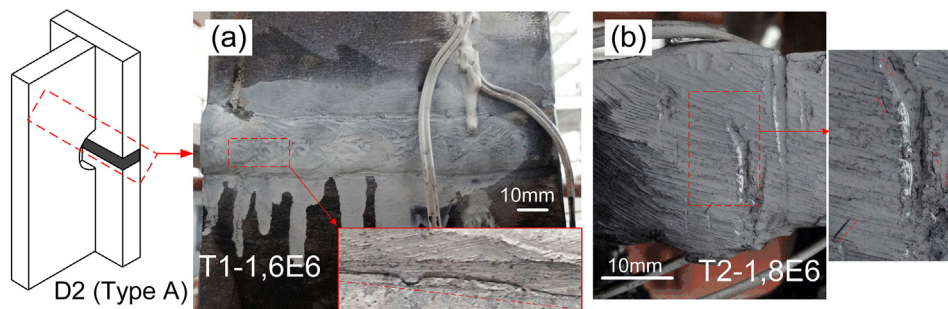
Location of surface cracks (joint type A) via magnetic particle inspection.
